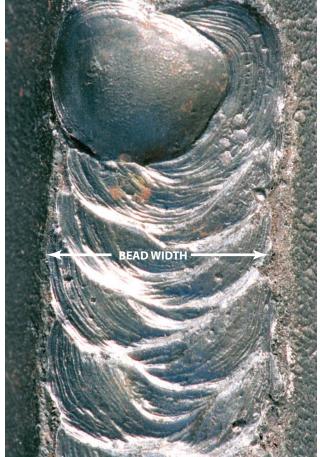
Filler pass using weave bead. The bead width should not be more than two times the rod diameter.
